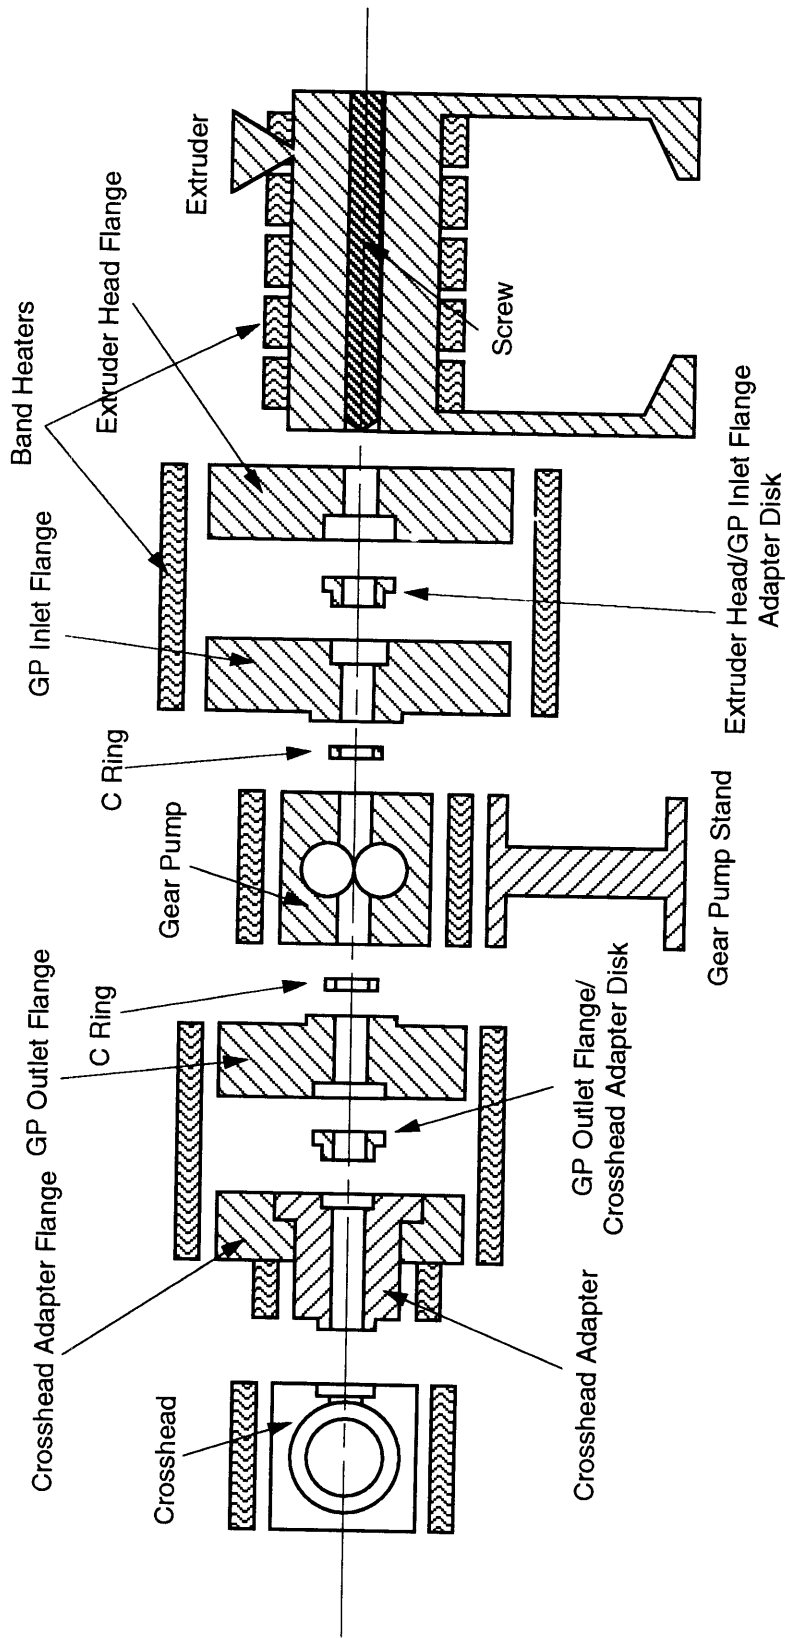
Assembly drawing for extruder, flanges, and gear pump.
